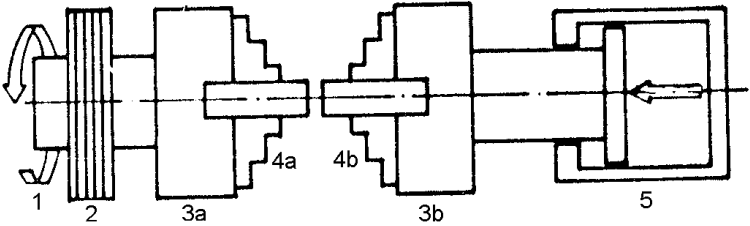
A schematic of flywheel induced friction welding machine [1, 5].
